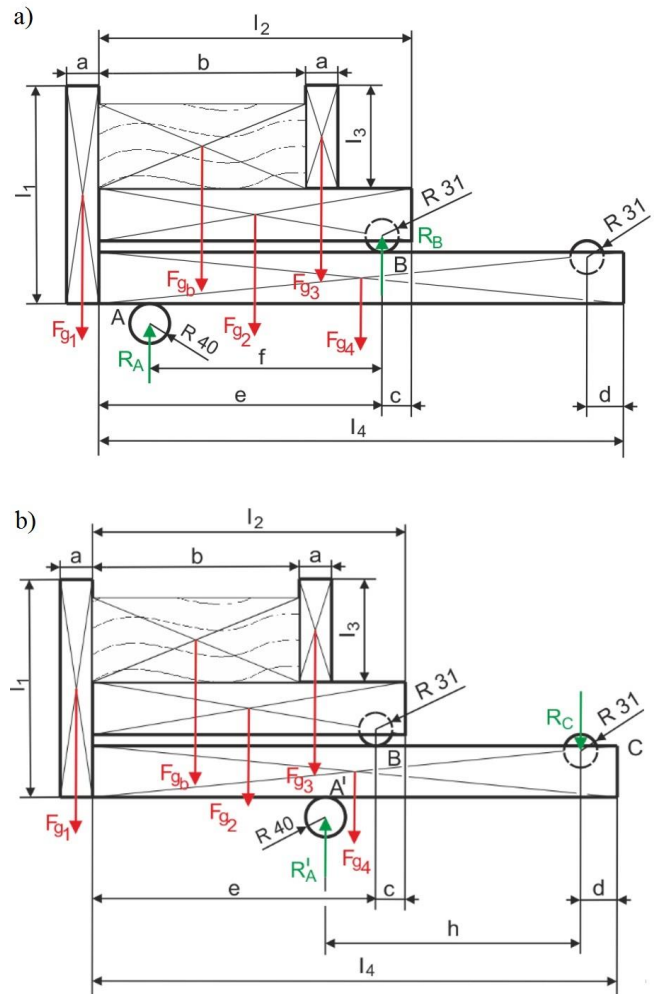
Releasing of the mechanism for pulling out a) and pulling in b)
